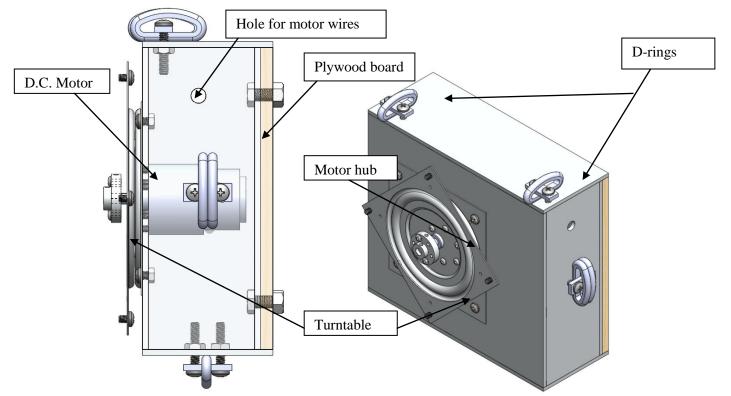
CAD model of rotational module- side view (left), isometric view (right)
